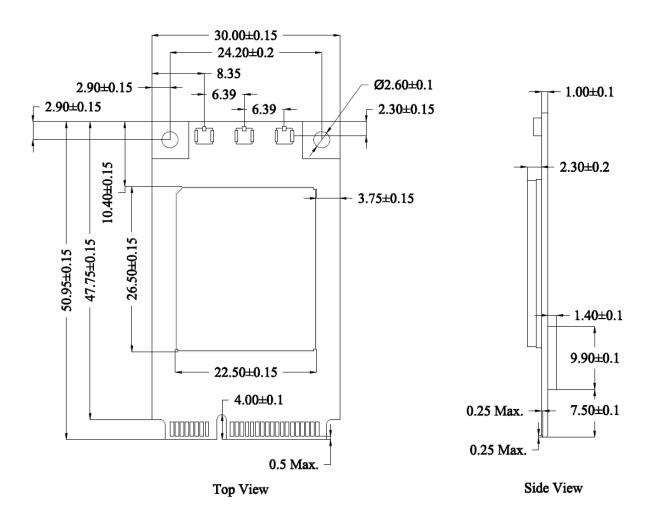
Mechanical Dimensions of BG96 Mini PCle
